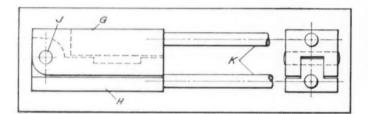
(Left) Simplified nutcracker jig showing the tongue-and-groove type of construction designed to eliminate side play when the tool is closed. This jig is especially suited for drilling holes that are located from the centers of other holes.
